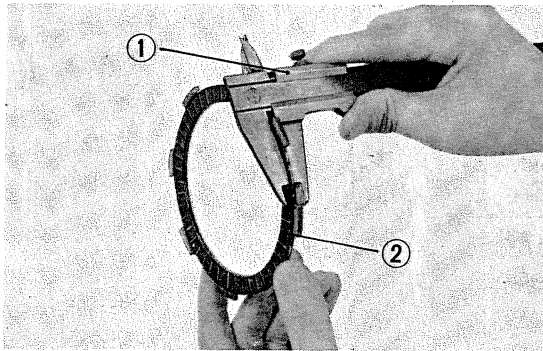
① Vernier caliper gauge ② Clutch friction disc
